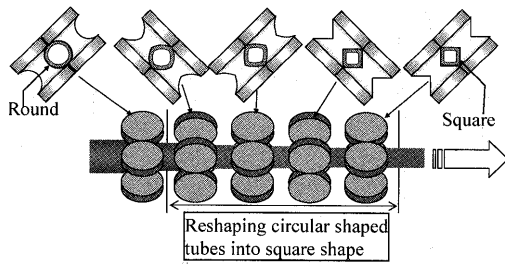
Schematic drawing of reshaping circular tubes to square cross-sectional ones using hot sizing mill.
